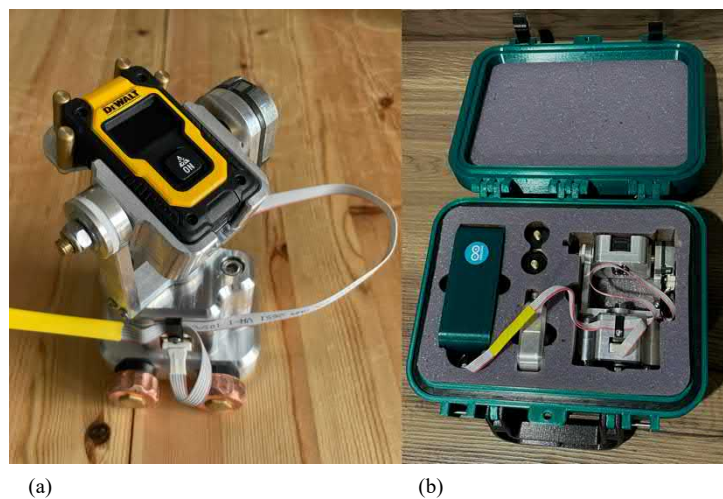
Complete CNC machined assembly of CMD (a), with protective case (b)
